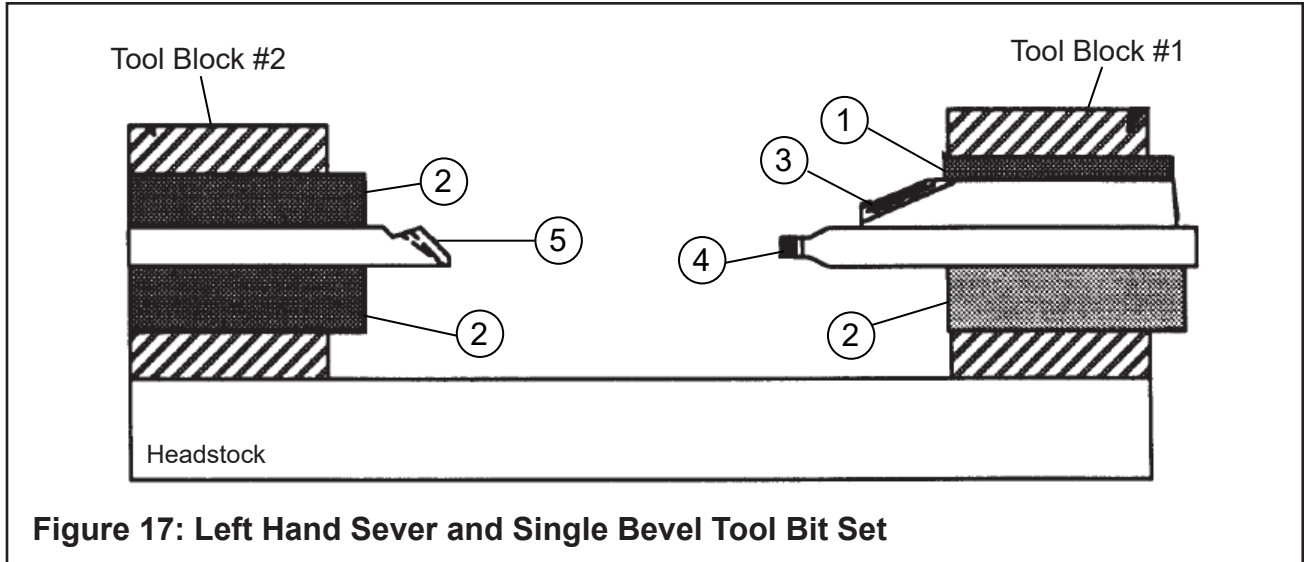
Left Hand Sever and Single Bevel Tool Bit Set
